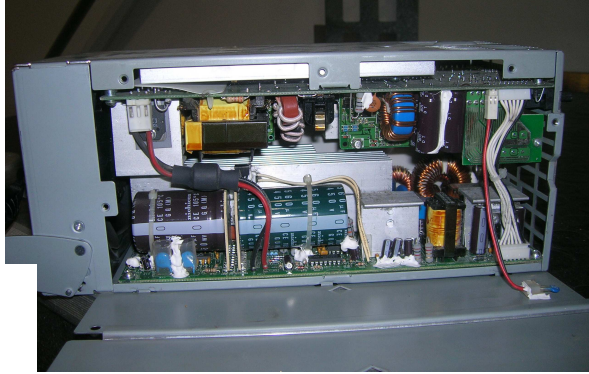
Heat sinks, circuit boards, and electronic components within power supply.
